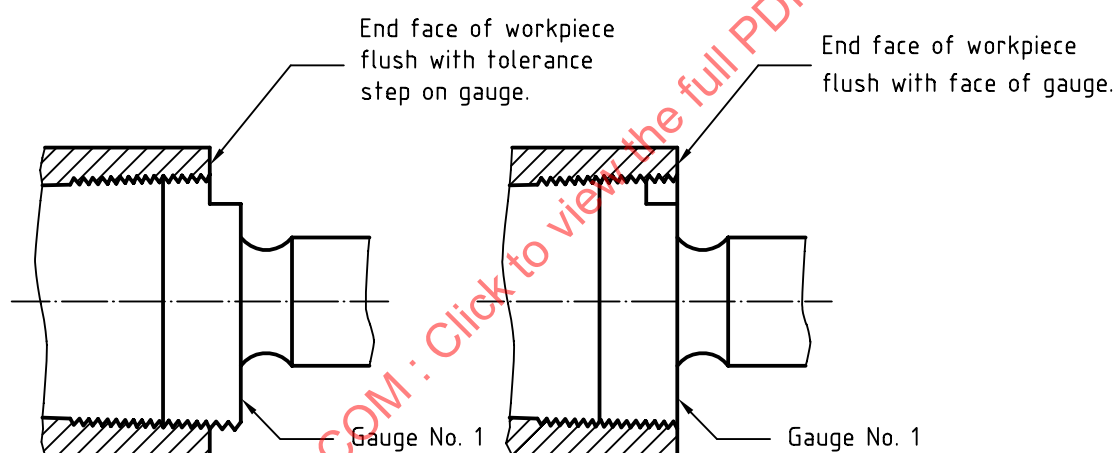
Checking of internal taper (Rc) and parallel (Rp) threads — Stage 1
